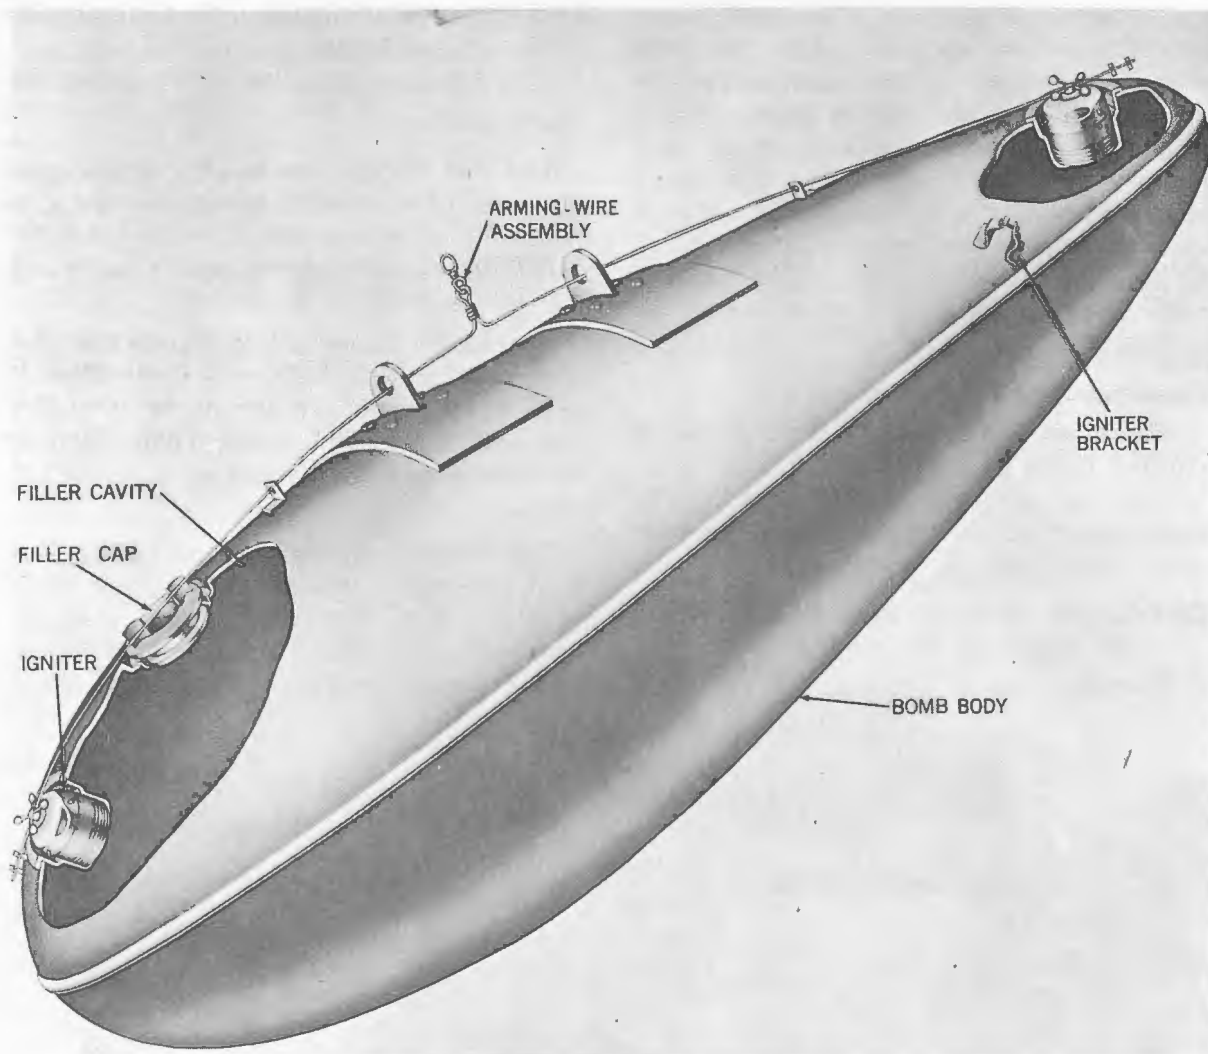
750-lb Fire Bomb Mk 78 Mod 2, Cutaway View.
